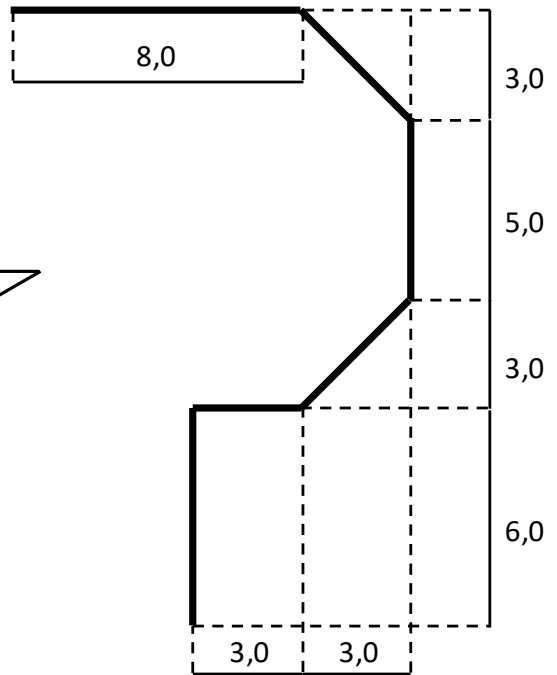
Technical drawings for the thermocontact holder at the manipulator.
